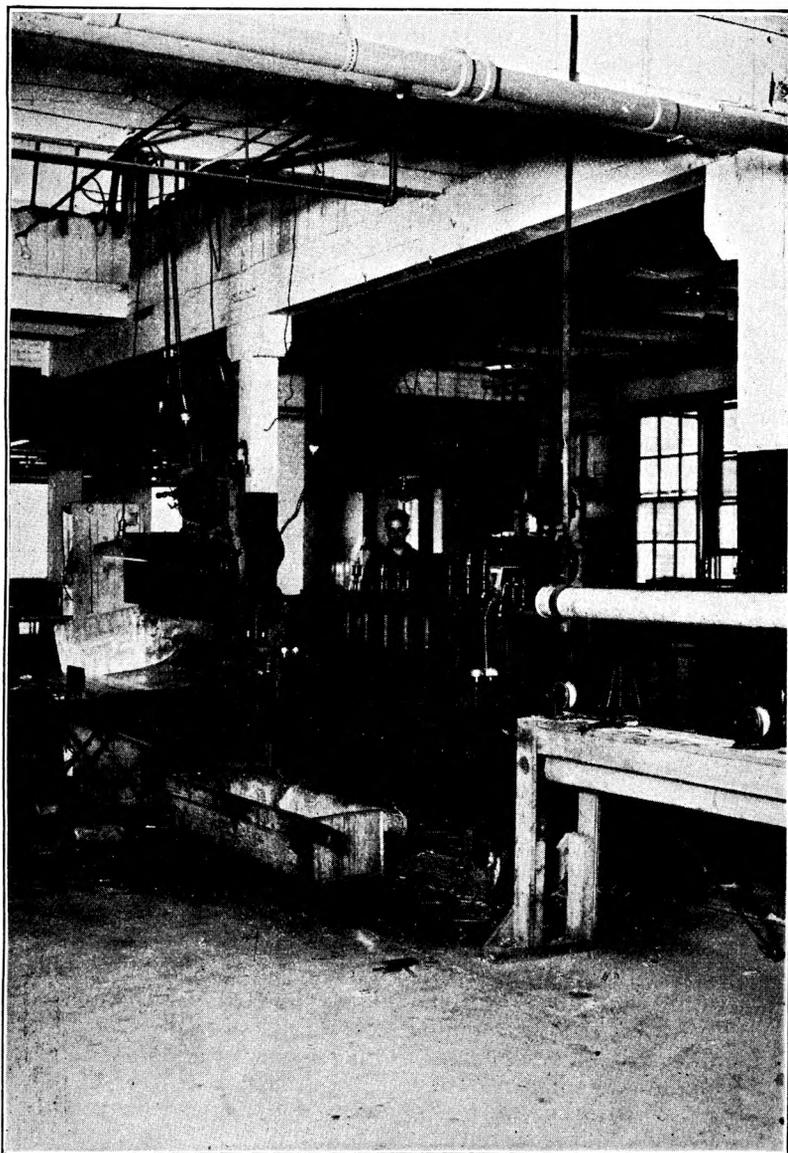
DANNER DRAWING MACHINE: DRAWING AND CUTTING APPARATUS
